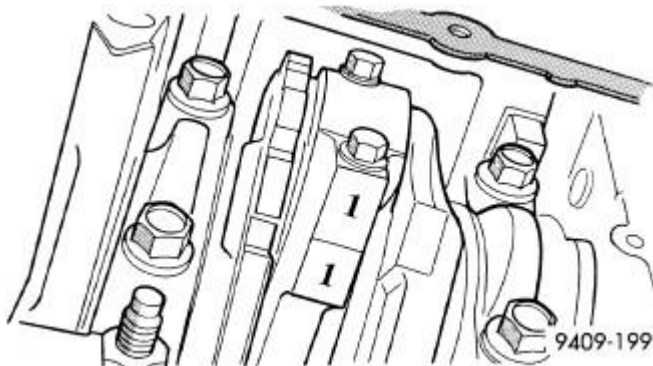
Identifying Mark On Connecting Rod And Bearing Cap
